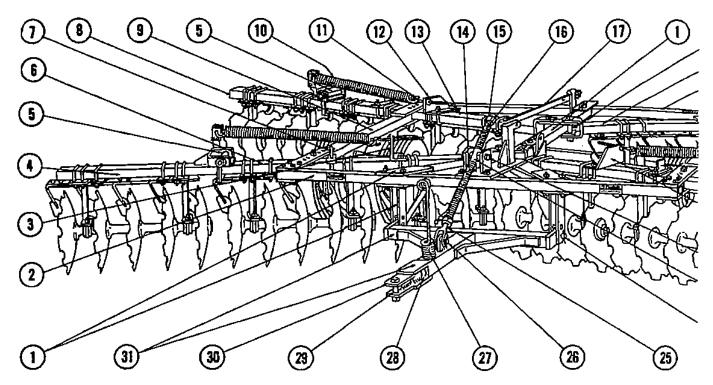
WING-TYPE WHEEL MOUNTED TANDEM H.
